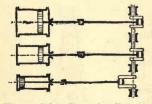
Triple Expansion Engine, with cylinders side by side; cranks at 120 degrees.
